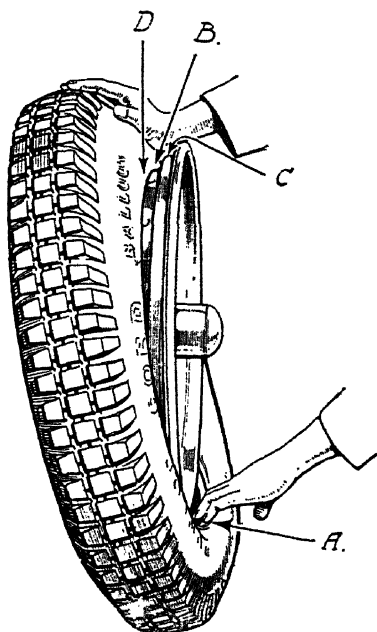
Removing a Low Pressure Tyre from Well-base Wheel Rim.
